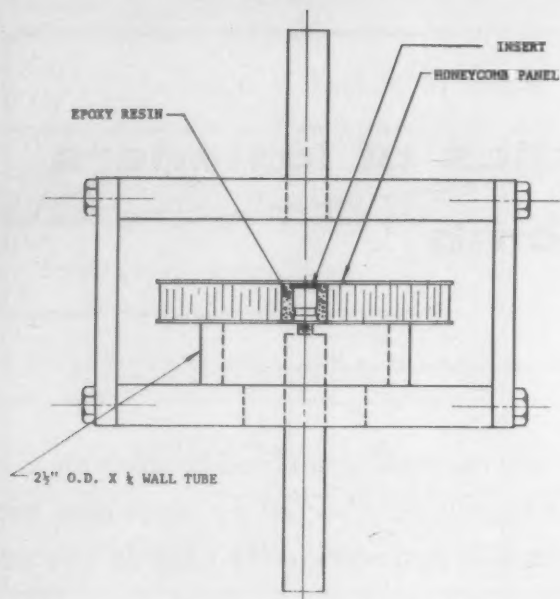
The honeycomb specimens were tested in this standard fixture.
